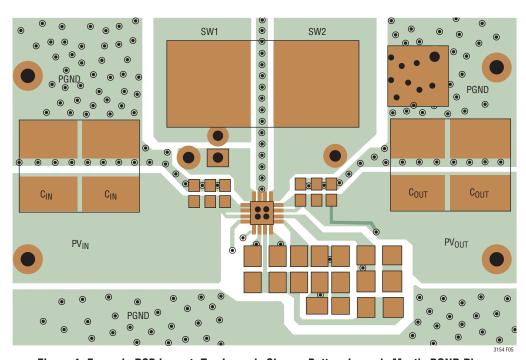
Example PCB Layout, Top Layer is Shown, Bottom Layer is Mostly PGND Plane
